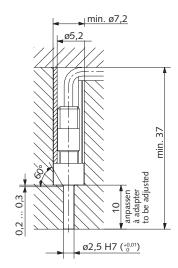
Mounting Type 6194B... with spacer sleeve Type 6459
